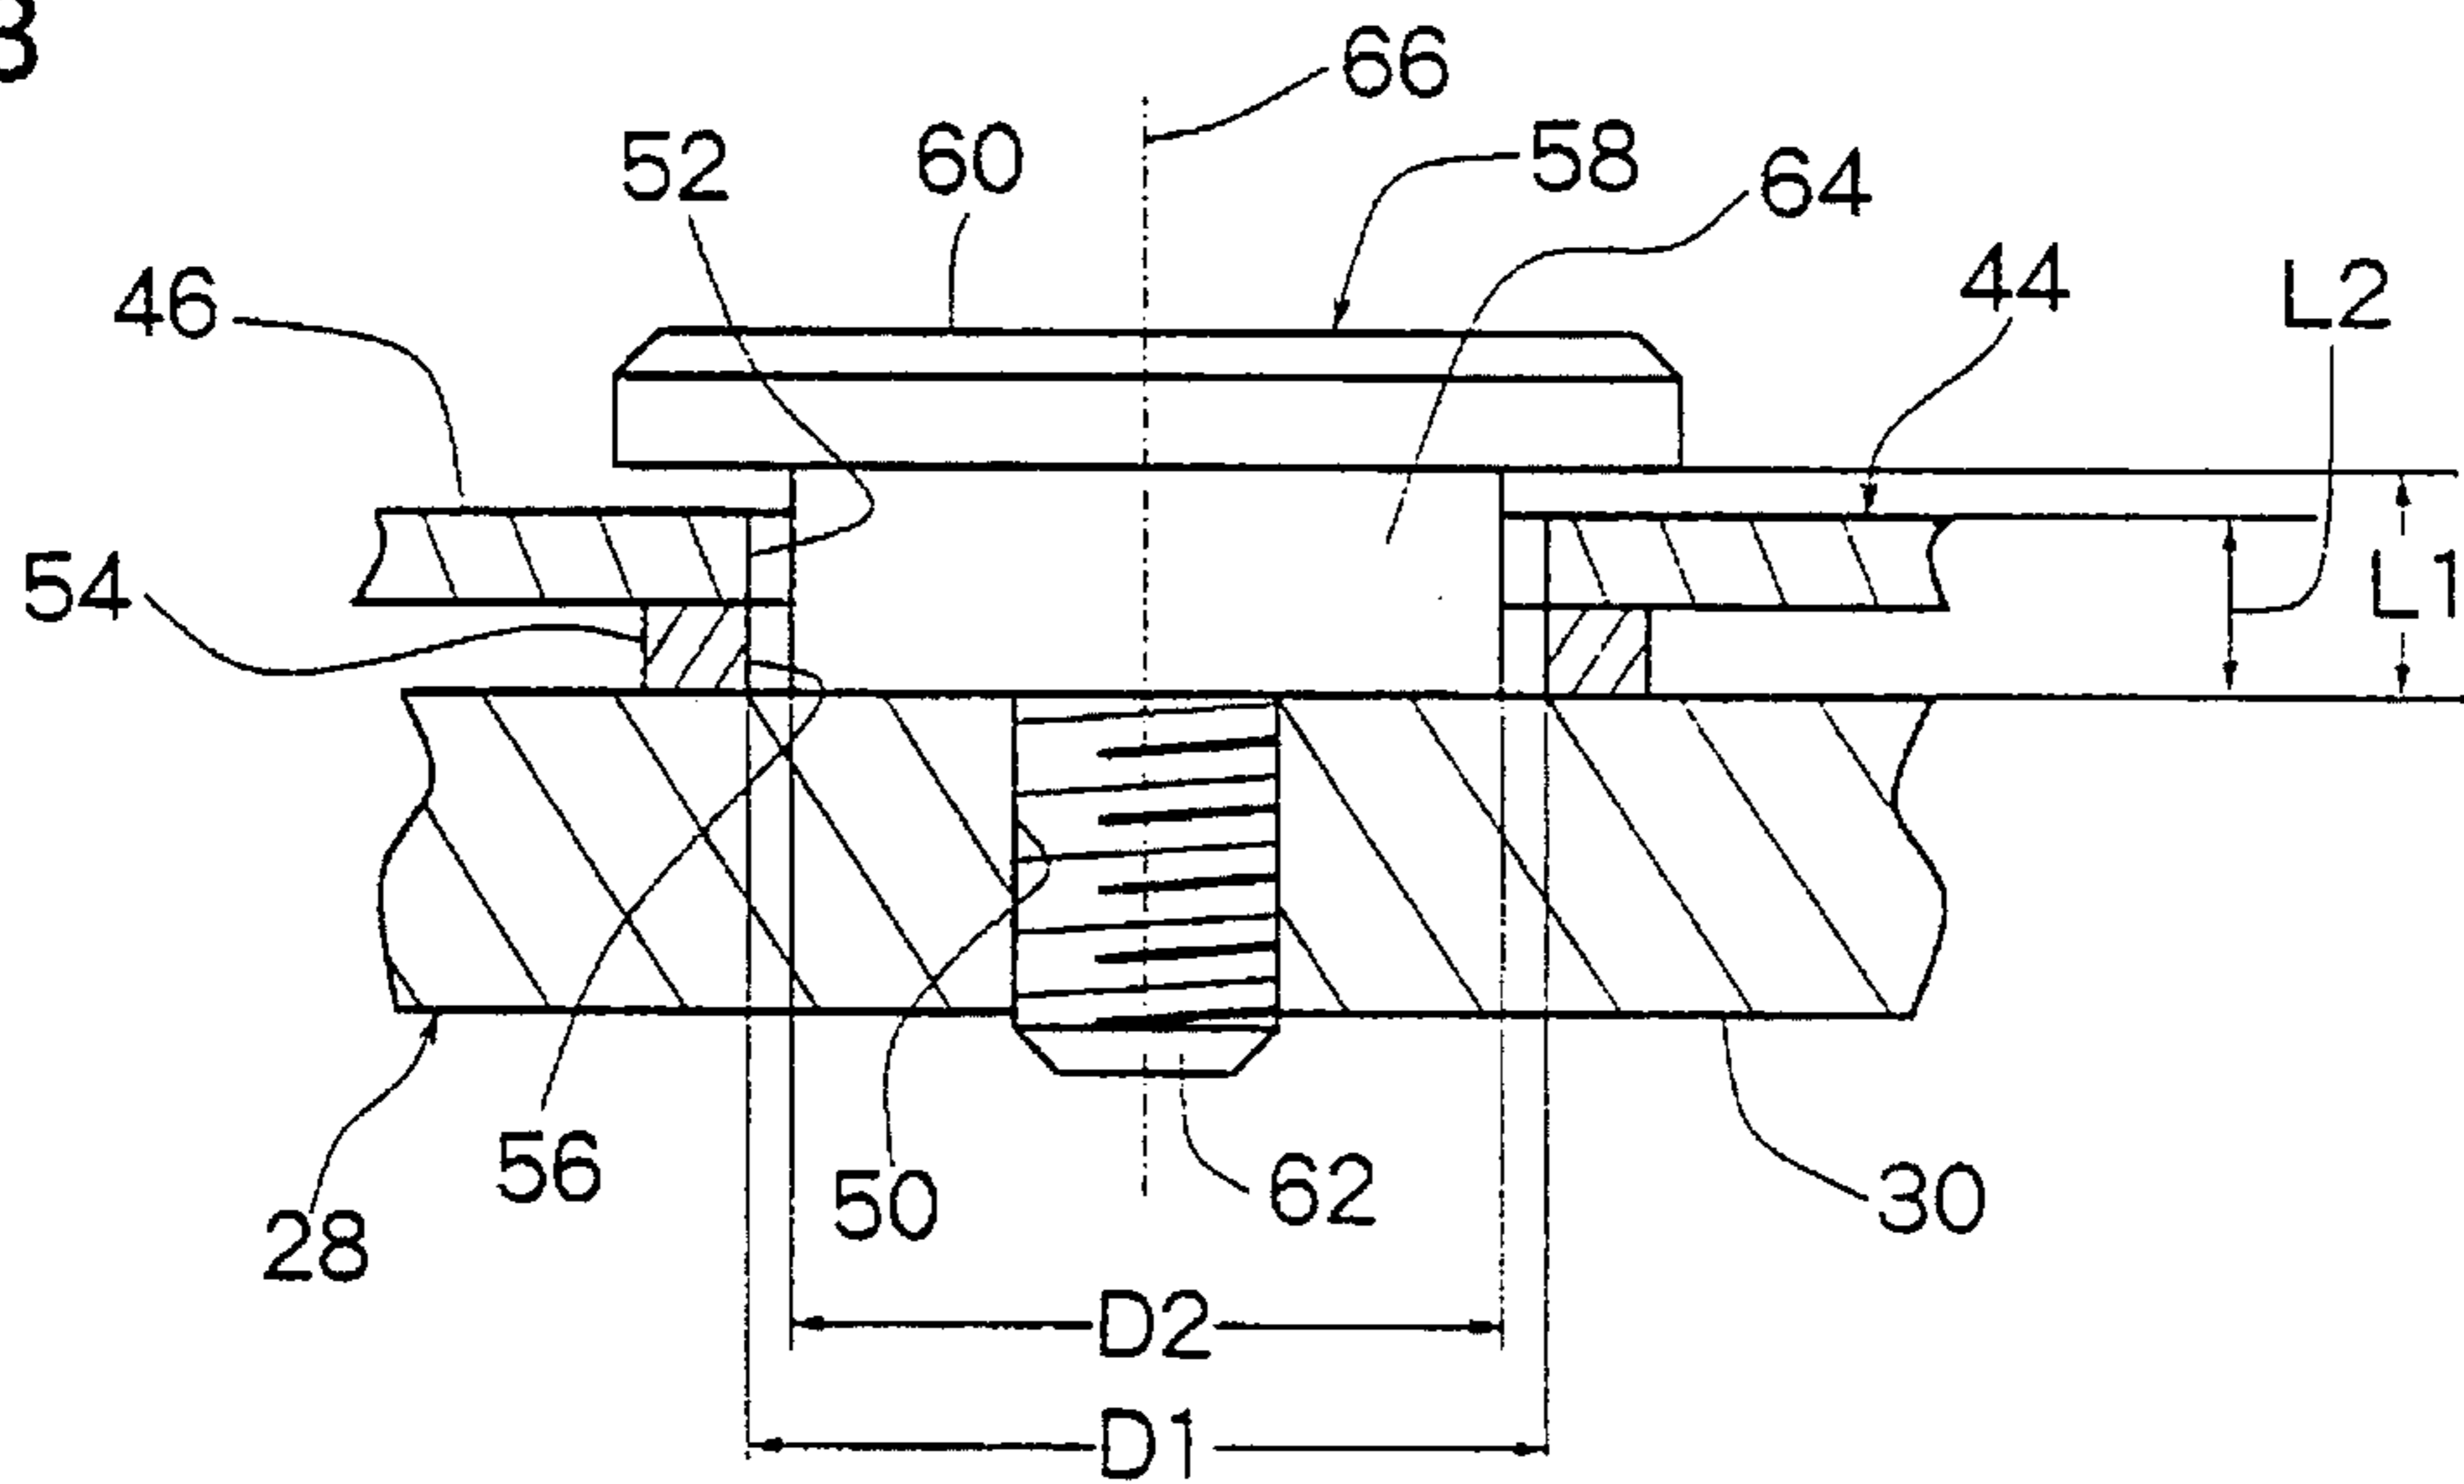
IMAGE-FORMING MACHINE EQUIPPED WITH CLEANING MEANS
